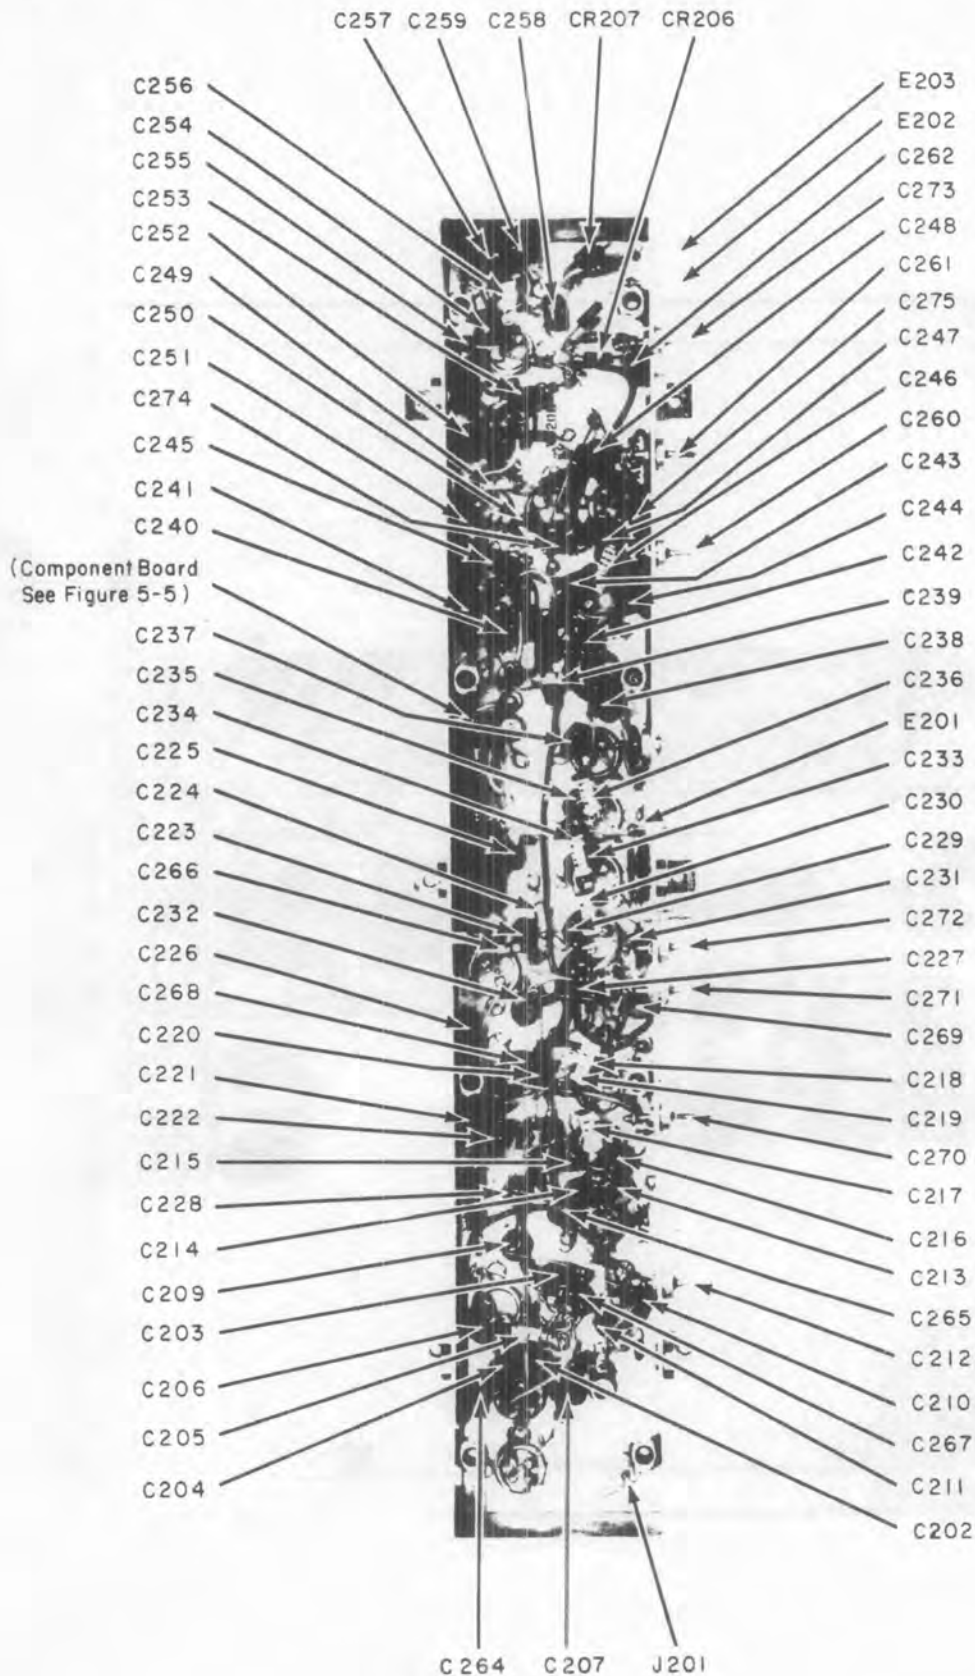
SM-9310A, Subassembly Chassis, Capacitor Location
